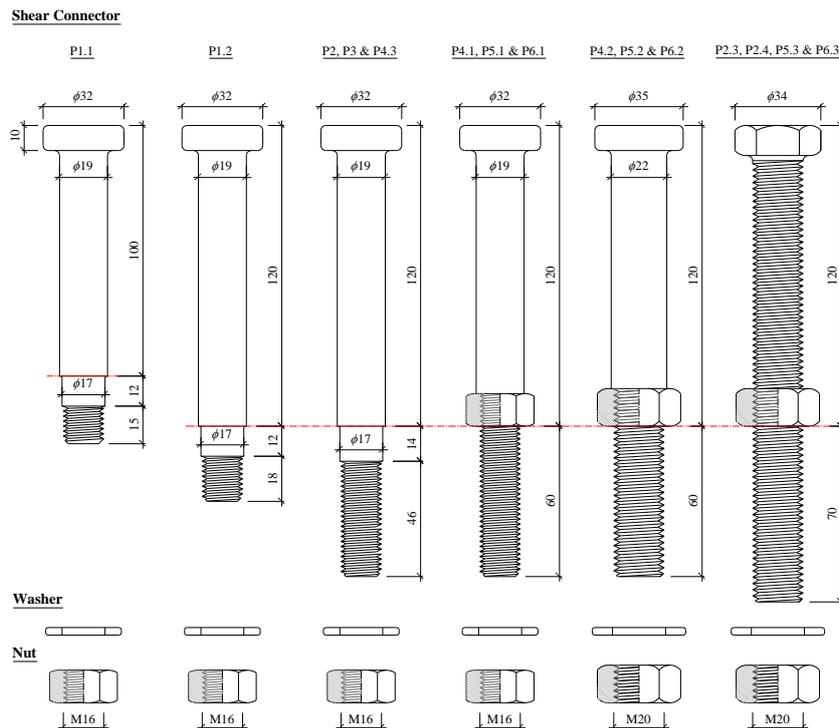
Type and dimensions of shear connectors (machined headed studs and Gr. 8.8 bolt; unit: mm)
